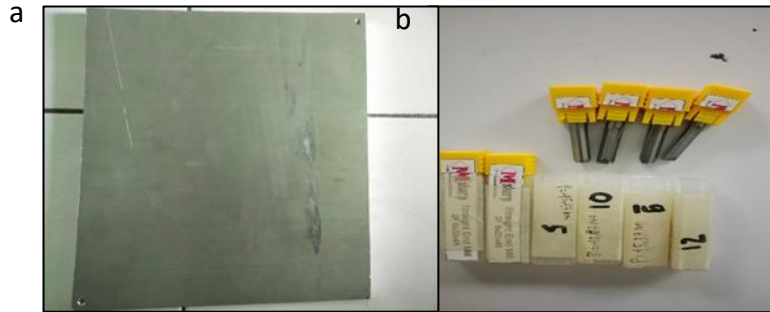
(a) Aluminium AI6061BE; (b) Straight End Mill
